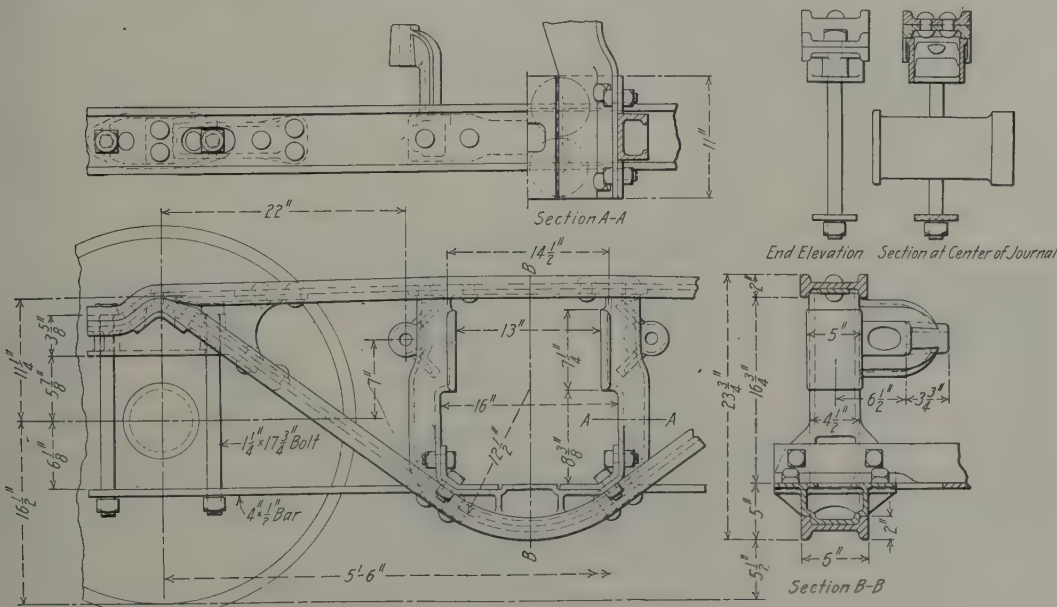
Built-Up Steel Side Frame. Summers Steel Car Company.
